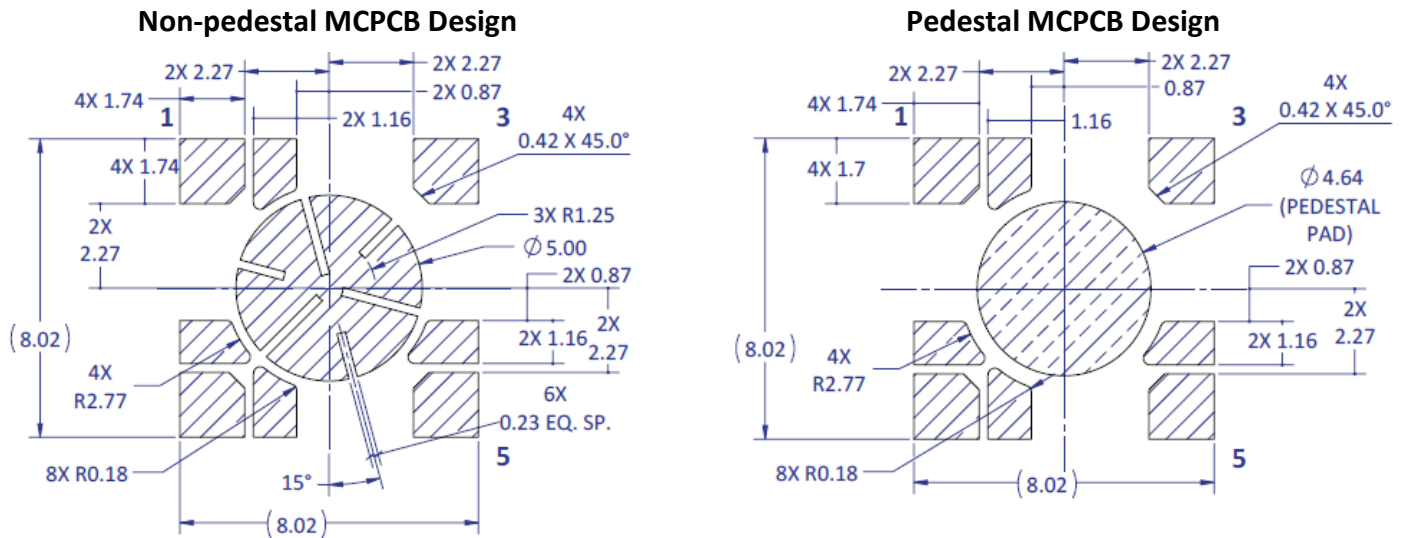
Recommended solder pad layout for anode, cathode, and thermal pad for non-pedestal and pedestal design
